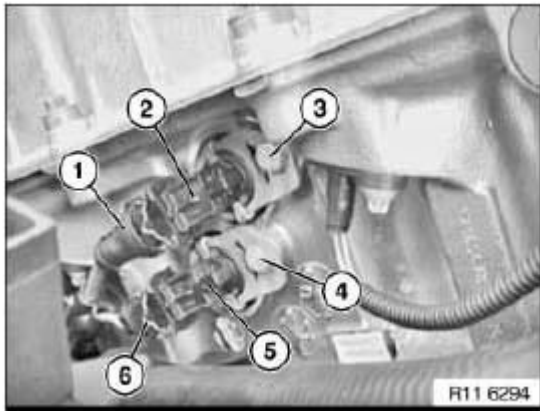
Identifying Inlet Solenoid Valve, Plug Connections, Exhaust Solenoid Valve, Screw And Bolt
